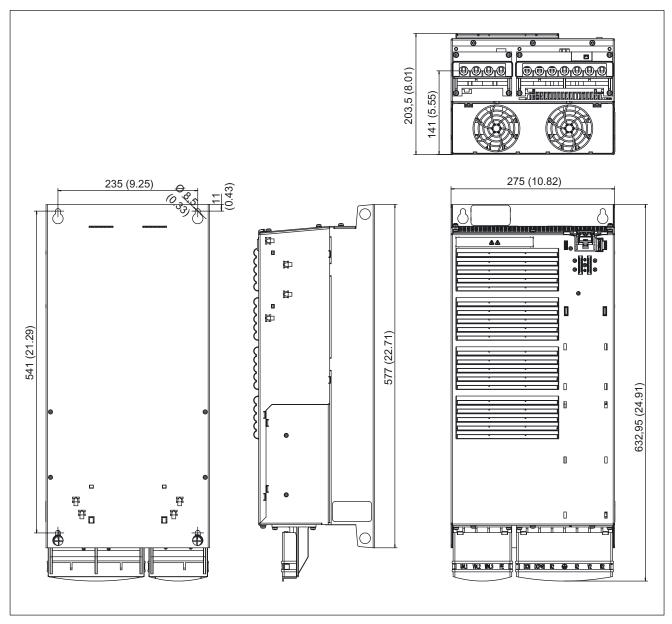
Dimension drawing: Power Module PM340 with integrated line filter, frame size FSE
